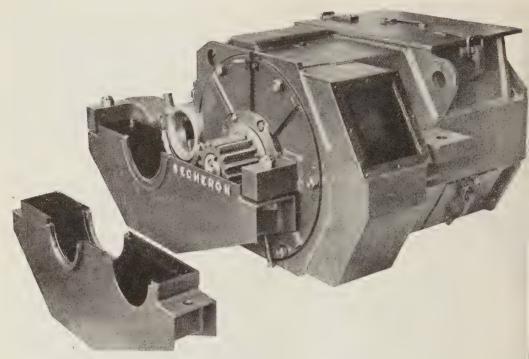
200-H.P. motor, with completely welded frame.
